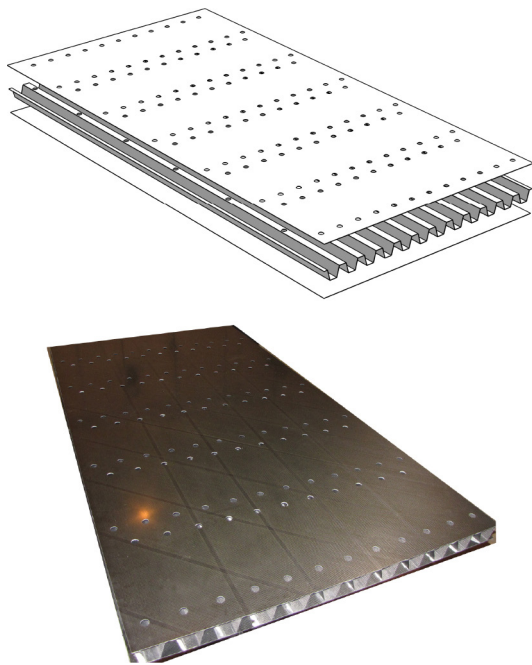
Exploded view drawing and photo of the 1.219 m by 2.438 m TCC test panel from [8].
